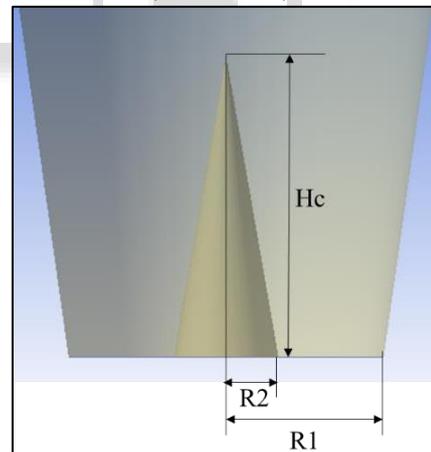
Cone Dimensions of Proposed Cyclone Separator
